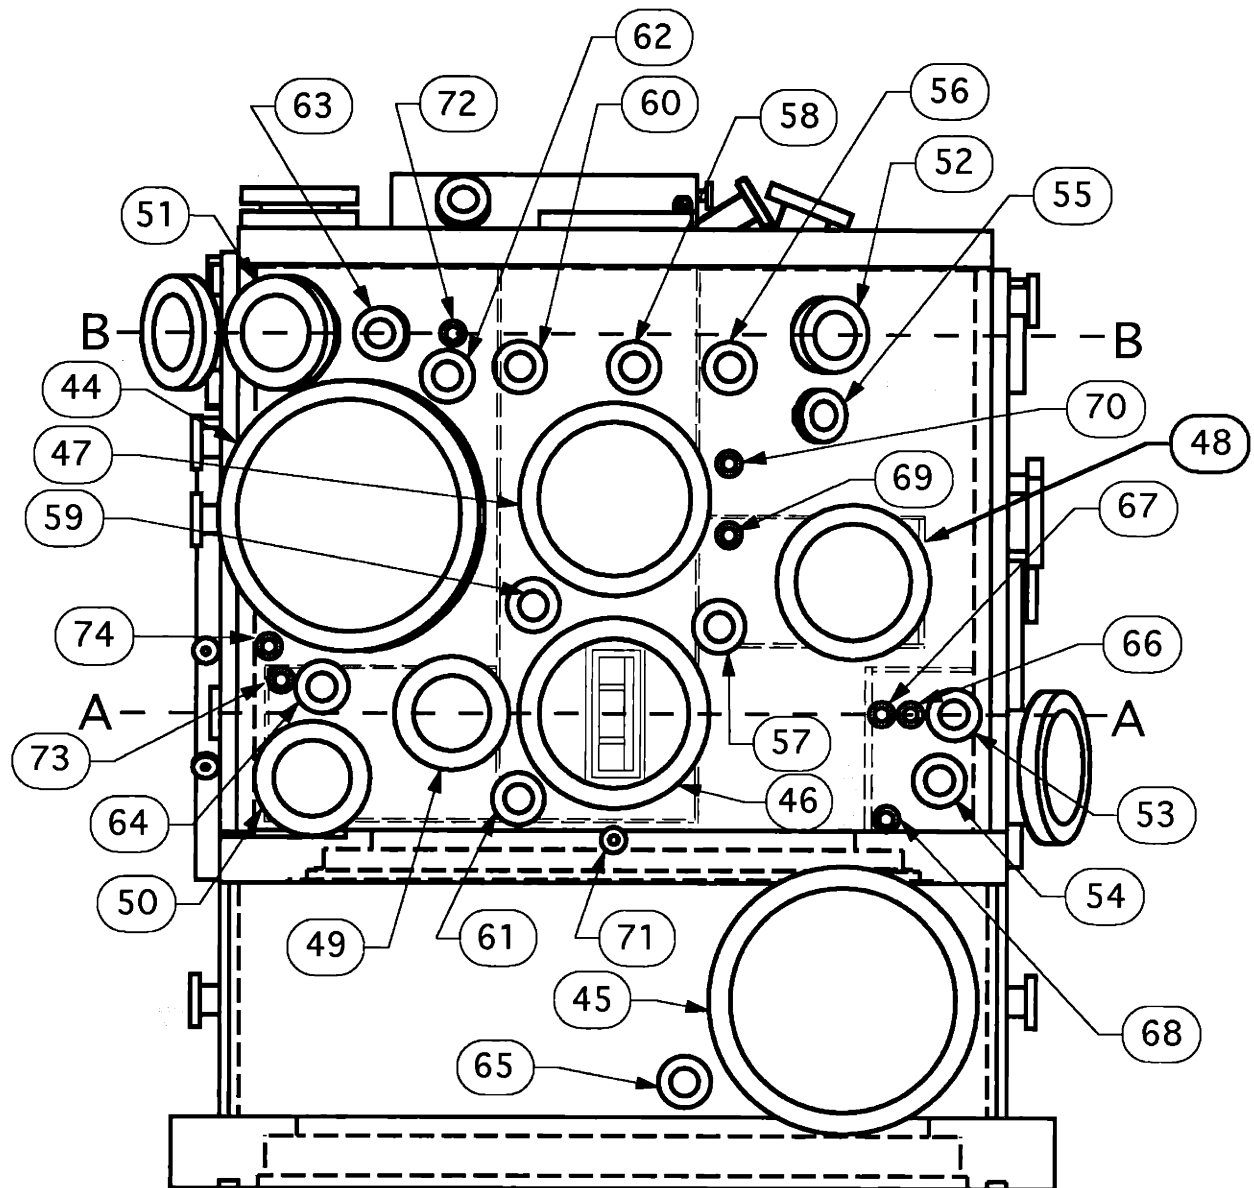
External layout of the Detector side of the primary welded assembly. Dashed lines A-A and B-B indicate the beam scattering and surface spectroscopy heights, respectively.
